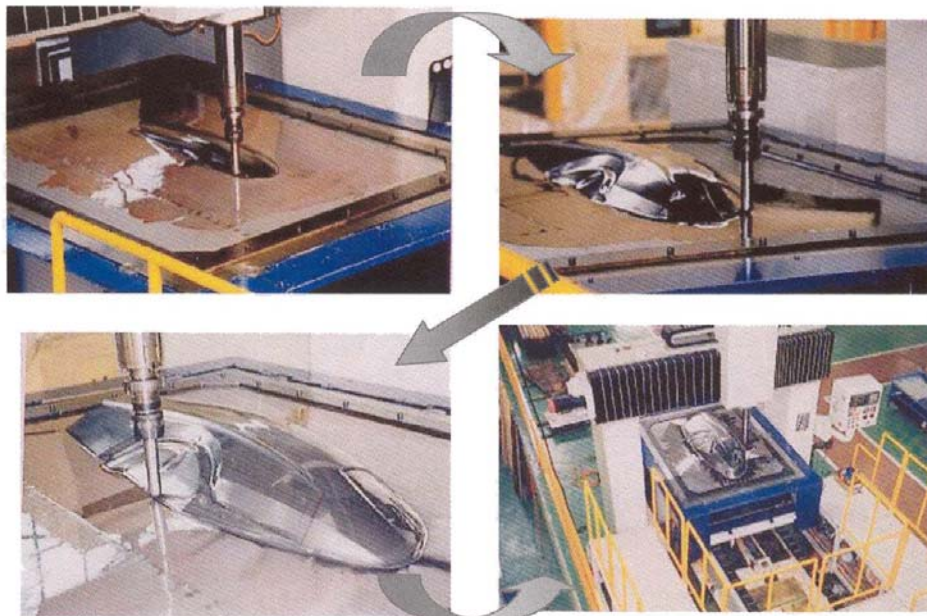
Actual dieless forming process using the Amino Corporation Sheet Metal Former.
